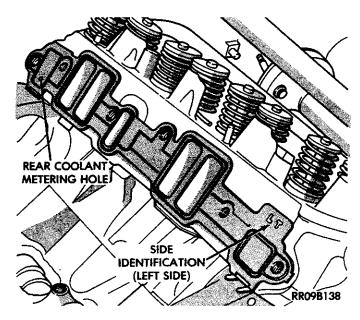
Engine Intake Manifold Side Gaskets (Left Side Shown)—5.2L
